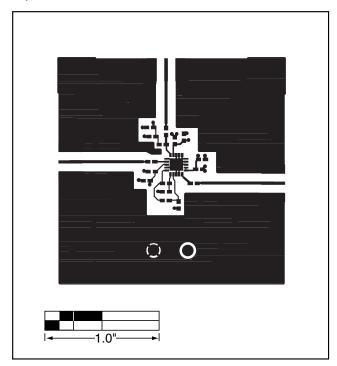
MAX9989/MAX9990 EV Kit PC Board Layout—Top Layer Metal
